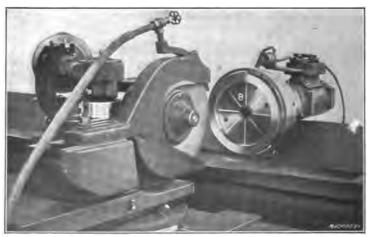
Grinding Side of Steel Ring which is held by a Magnetic Chuck
